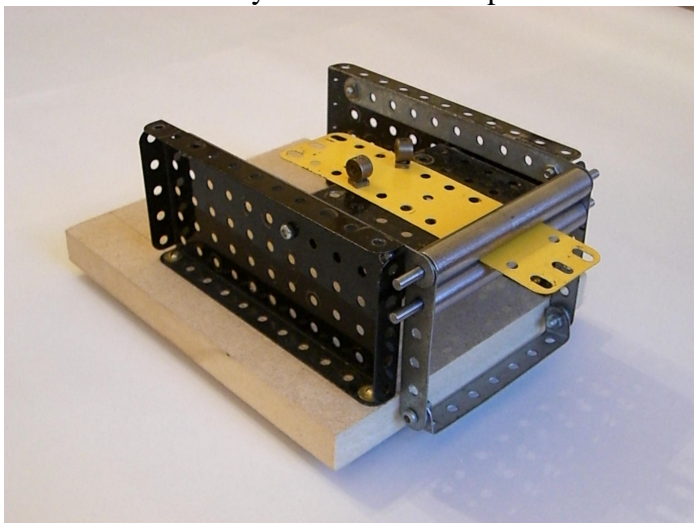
shows an 11h x 3h flexible plate in position in the bending jig ready for bending and it will be seen that the flexible plate is held in the required position by two threaded pins (collars have been screwed onto them for greater clarity in the photograph.) to prevent it being drawn through the rollers by the bending action..
